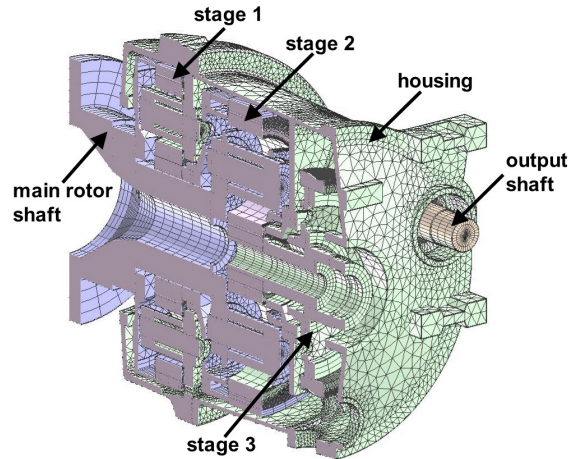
Cutaway view of the finite element model of the Orbital2 W3600 gear train.
